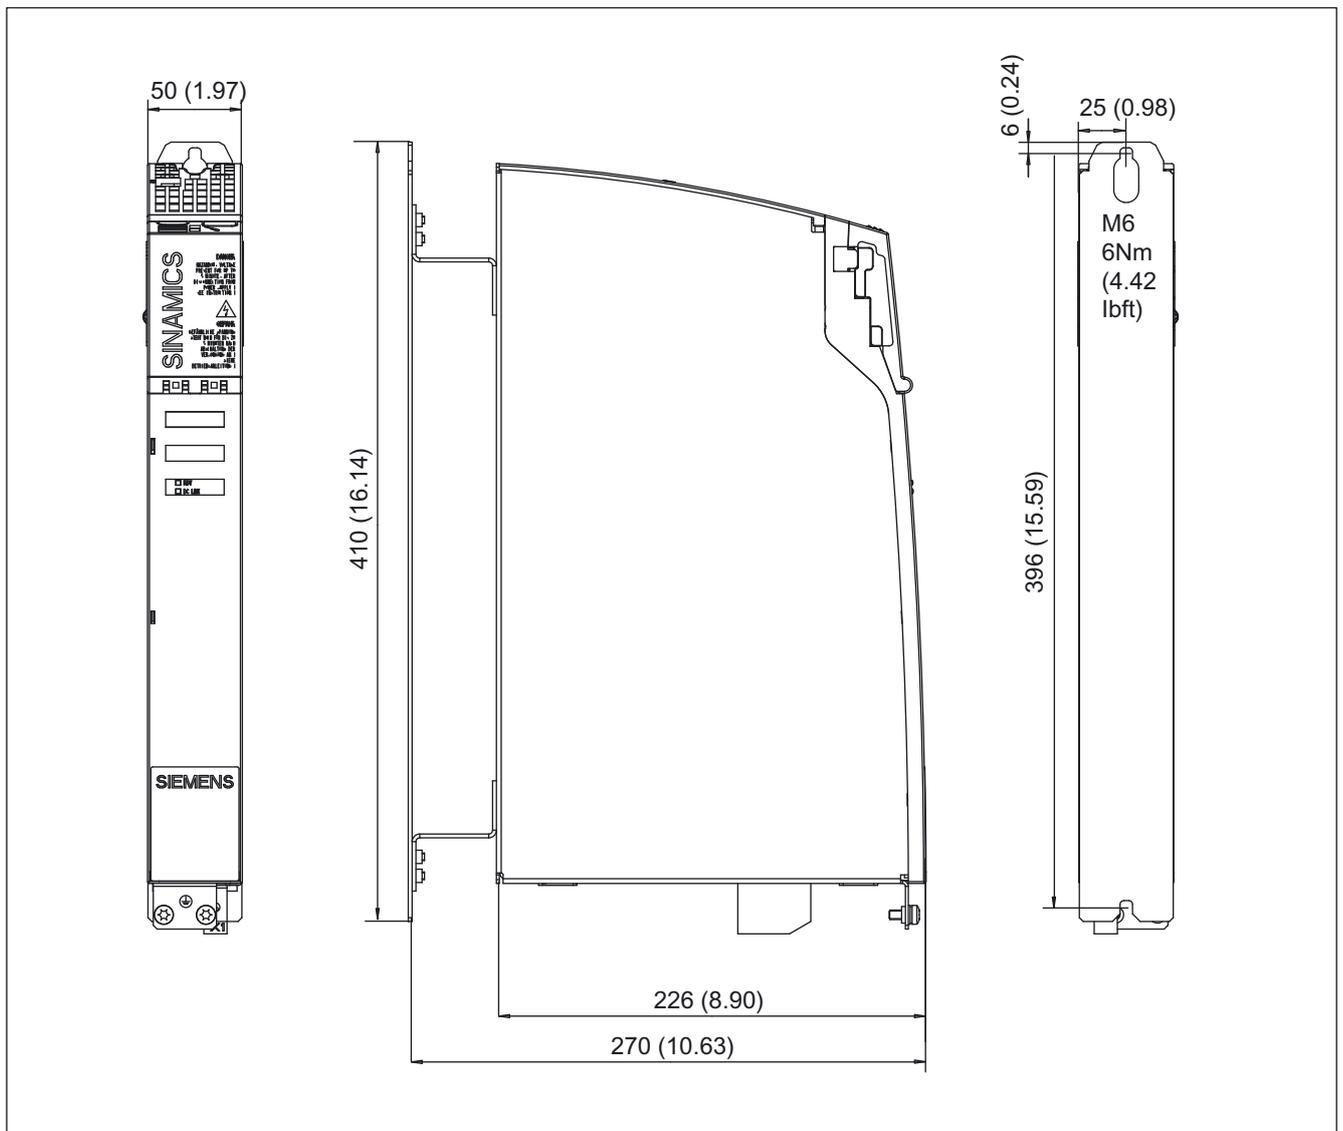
Dimension drawing of the Voltage Clamping Module
